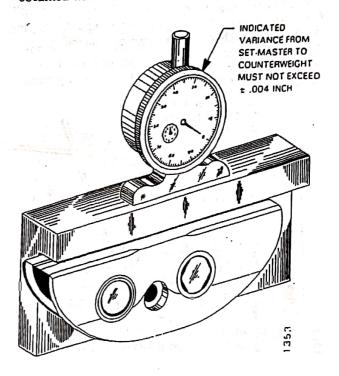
Checking Center Line Position of Counterweight Using Gage Fixture ST-94
